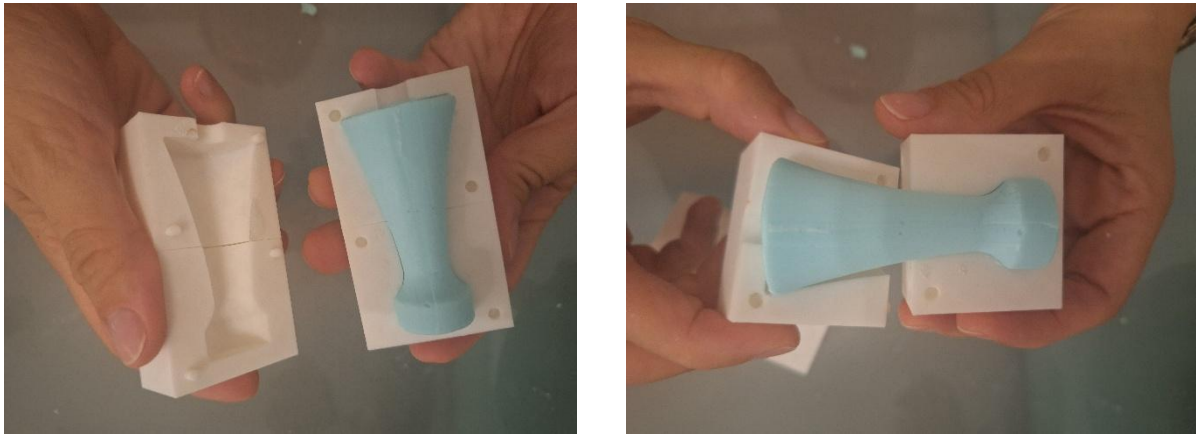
Unmoulding the finished soap chess pieces from two (left) and four-piece moulds (right).
